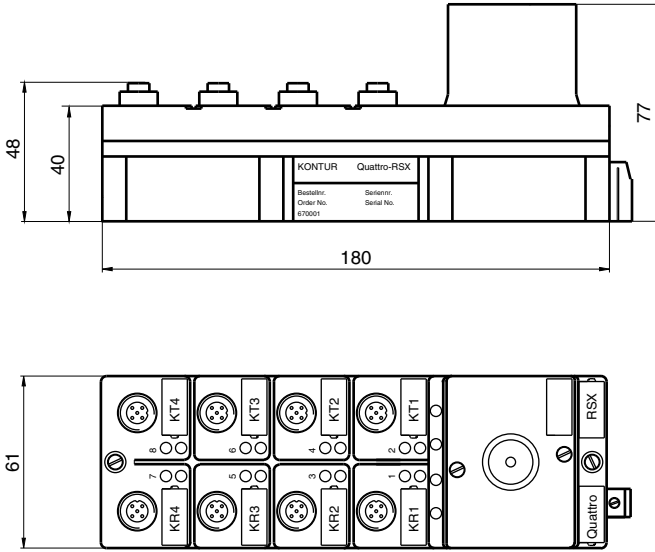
Dimensioned drawing of QUATTRO control device:
